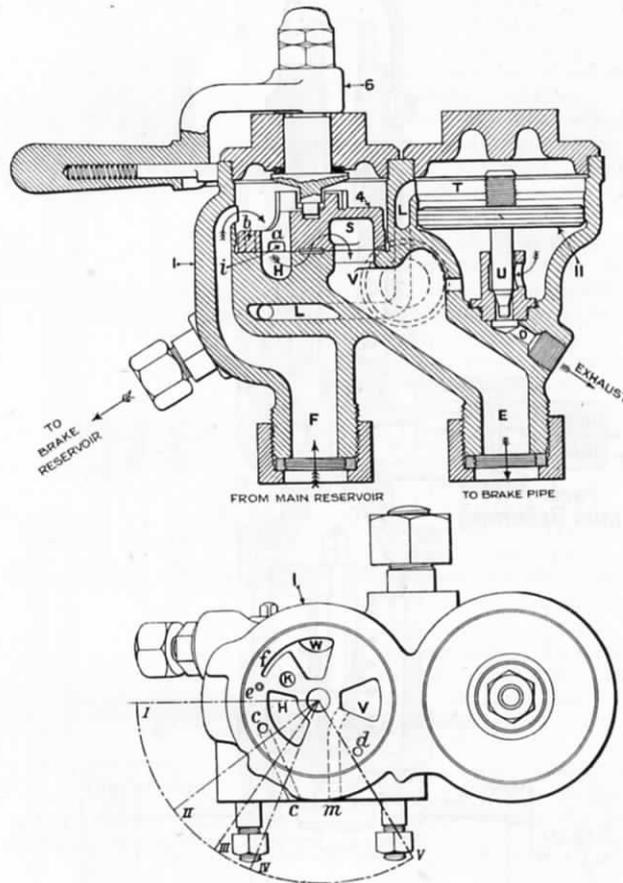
SECTIONAL AND PLAN VIEWS OF DRIVER'S BRAKE VALVE.
